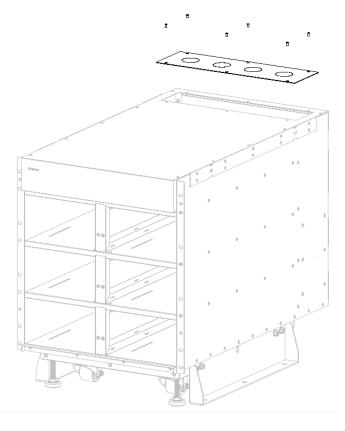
Removing the Battery Cabinet Top Conduit Plate, Front View
